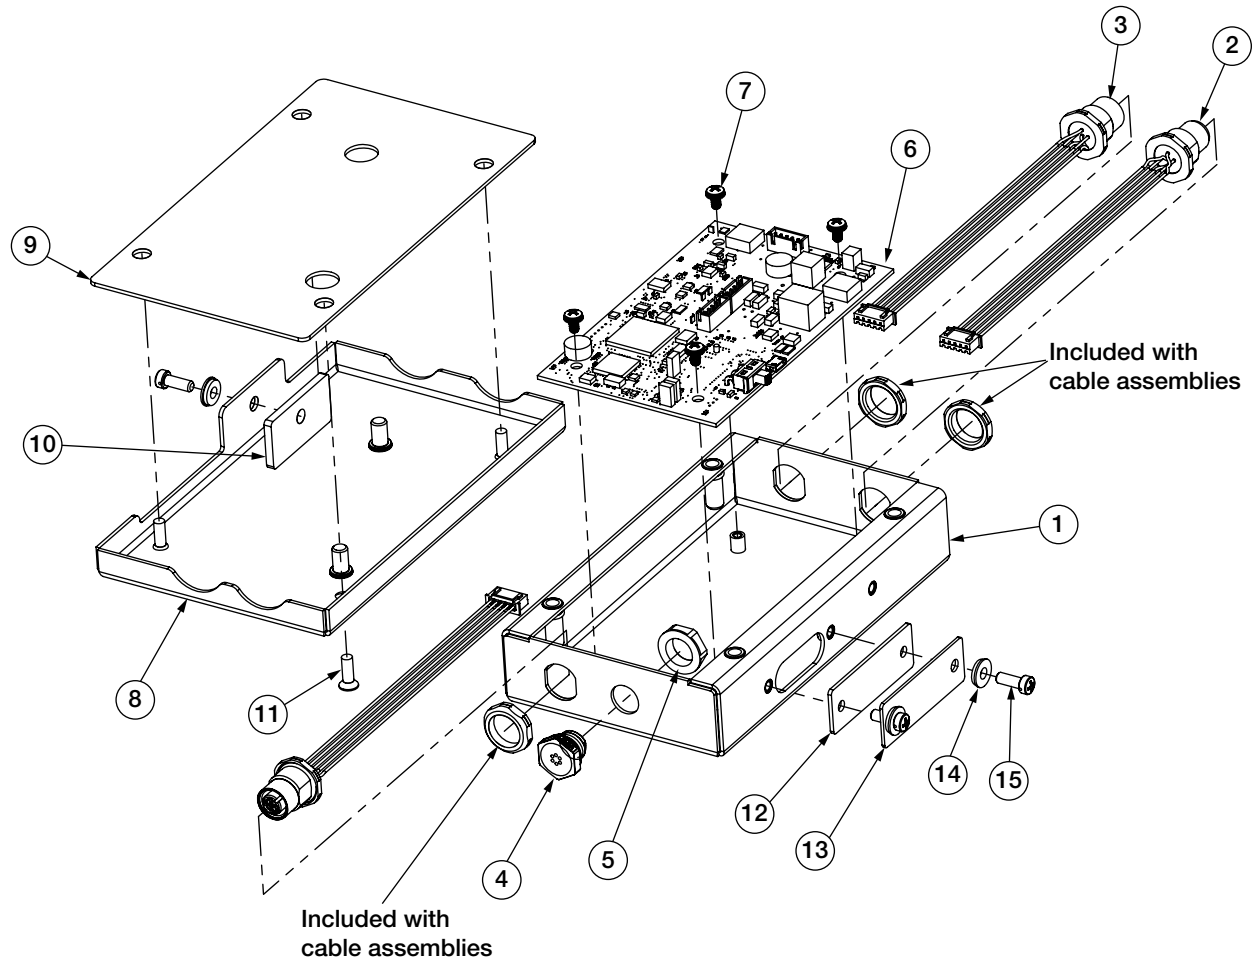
iQube2 J-Box Assembly, PN 164071
